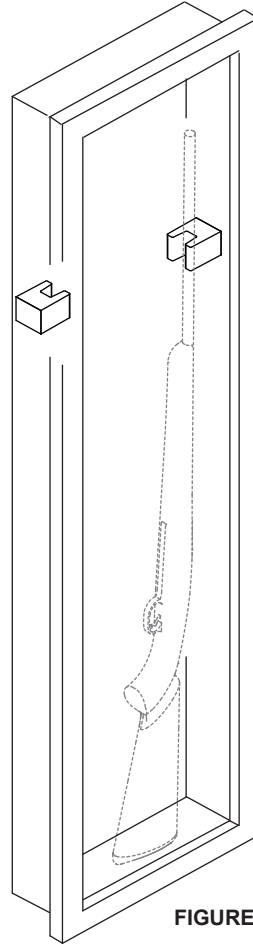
shows the installation of the safe in a wood framed wall (16" centers). For securing the safe to the wall studs the safe must be attached to the wood studs of the wall through the six pre-drilled mounting holes in the safe, with the frame of the safe flush to the wall surface.
